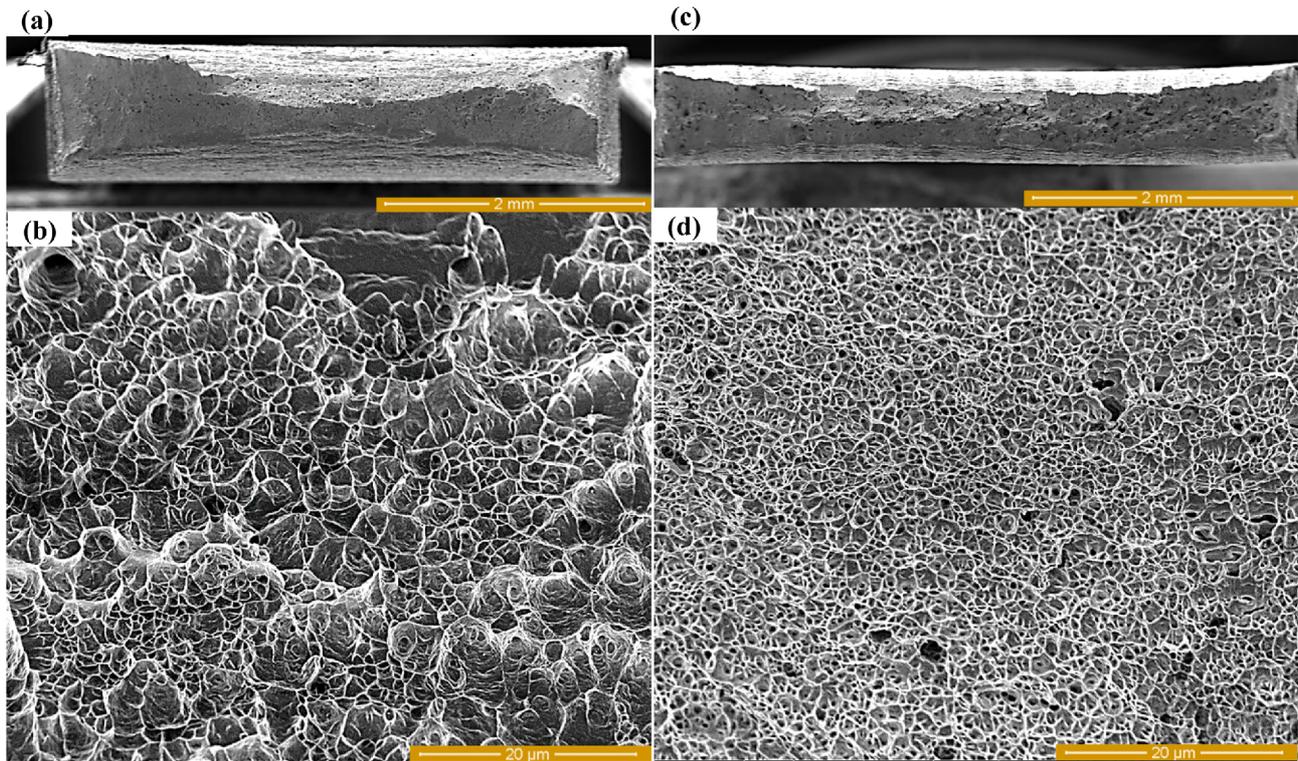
Overview and detailed view of the fracture surface of welded specimens. (a, b) FSW and (c, d) LW
